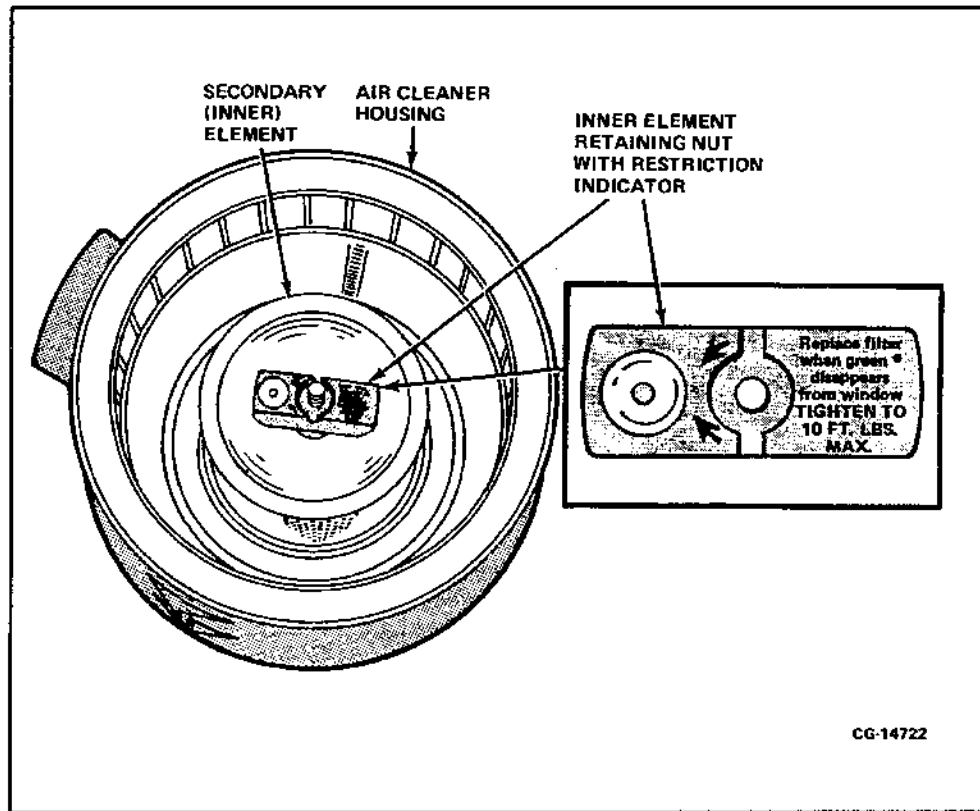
Top View of Dual Element Air Cleaner with Retaining Nut Indicator
